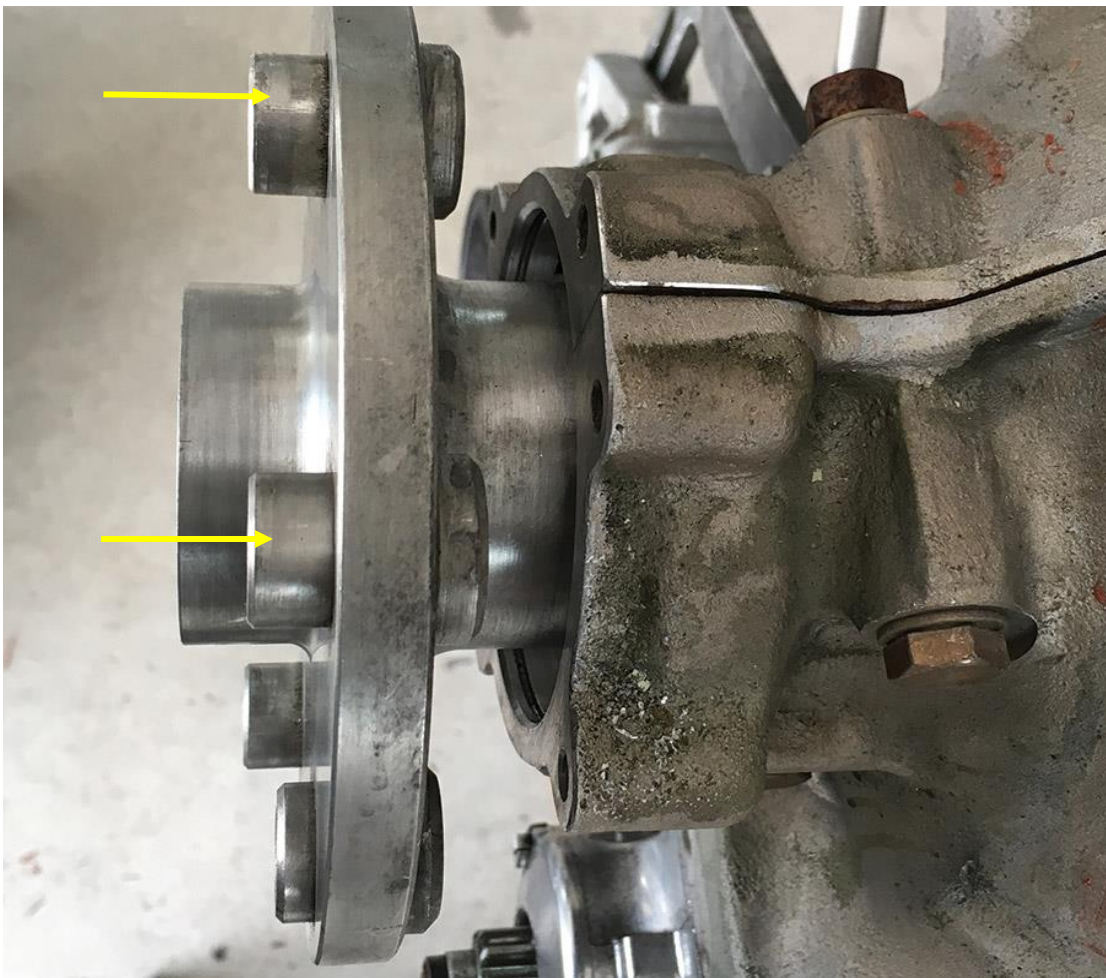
A view of the crankshaft flange with some of the drive bushes indicated by yellow arrows.
